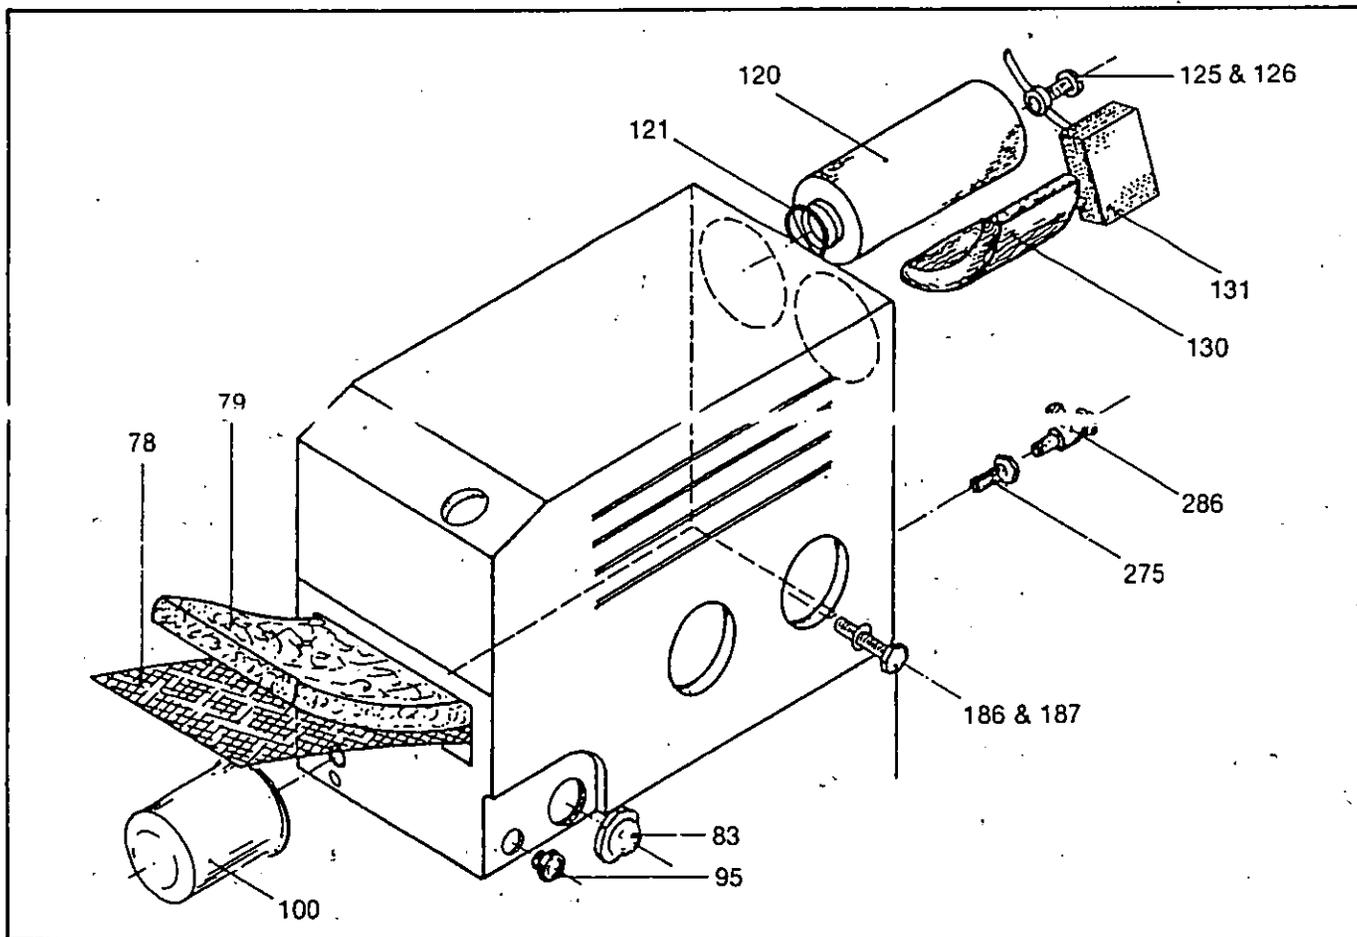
EXHAUST BOX COMPONENTS INSTALLATION (100 model shown)
